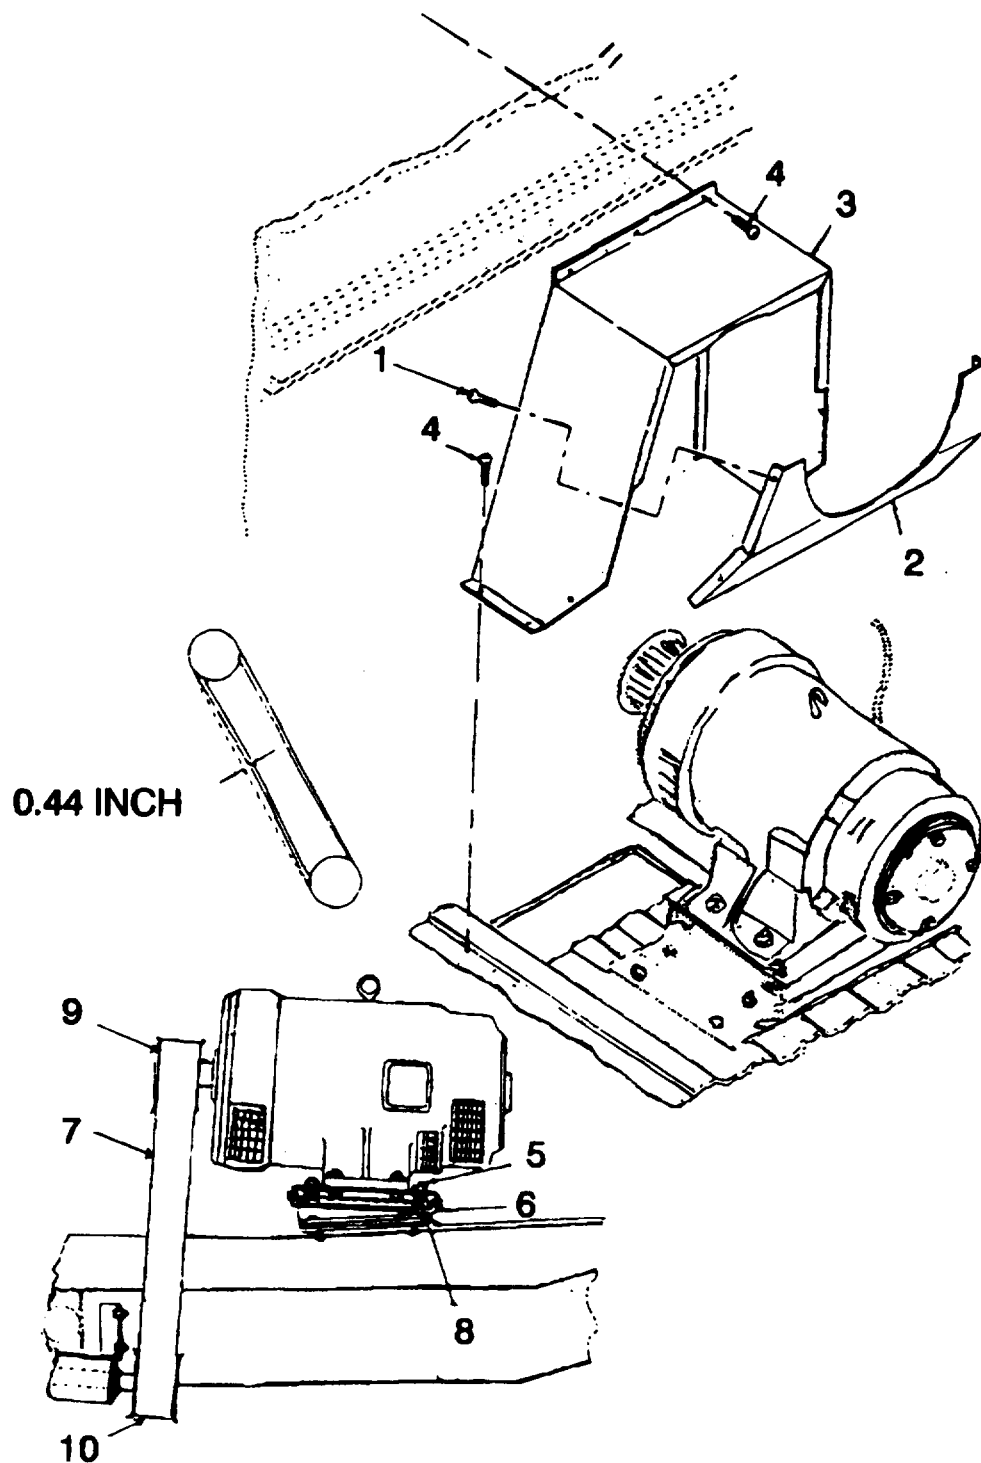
Positive Drive Belt, Removal/Installation/Adjustment.
